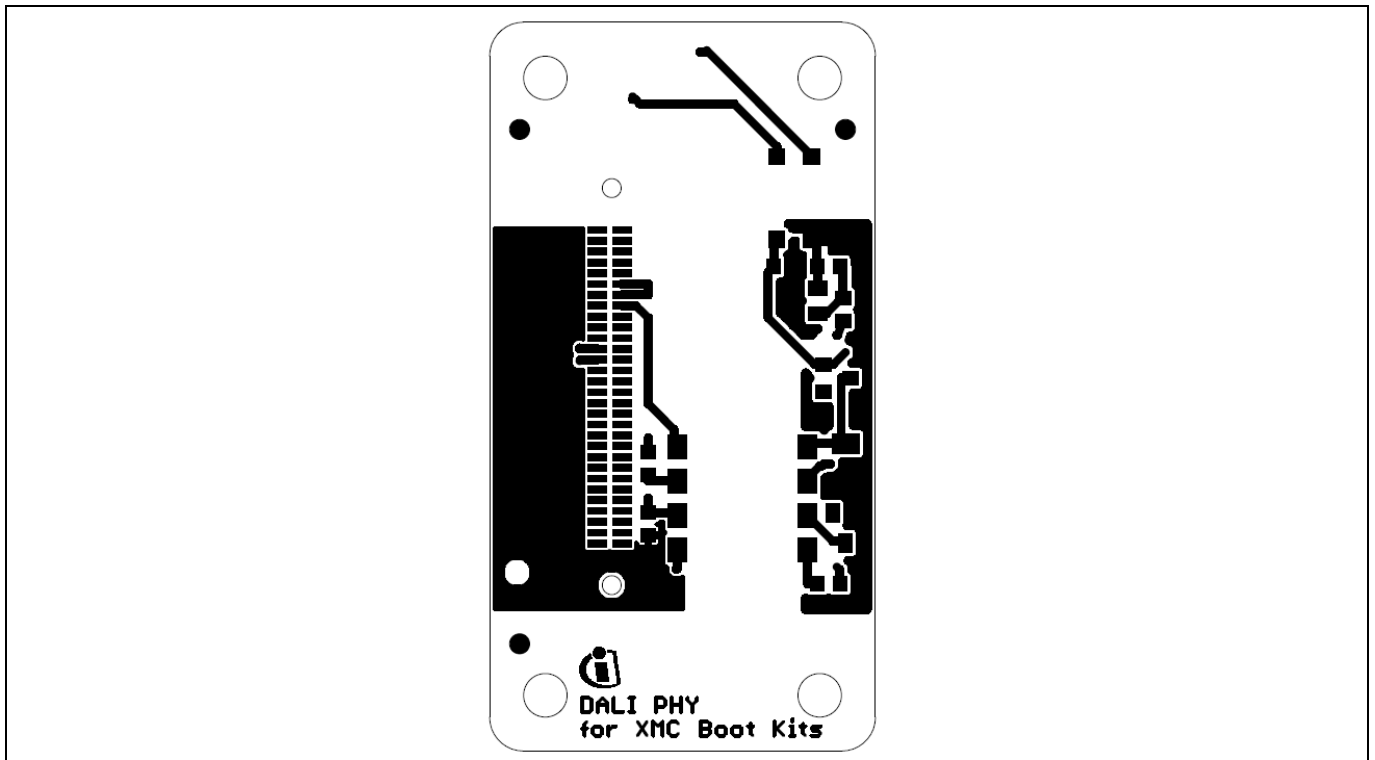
Layout top view of DALI PHY for XMC™ Boot Kits card
